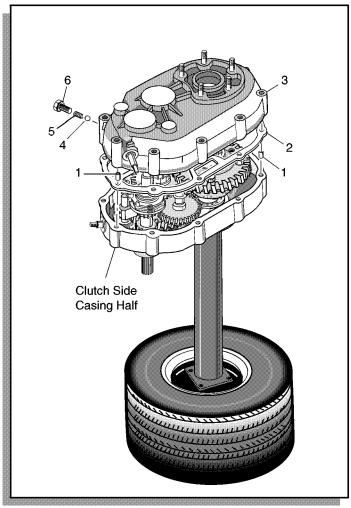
Transaxle Case Assembly and Shifter Detent
